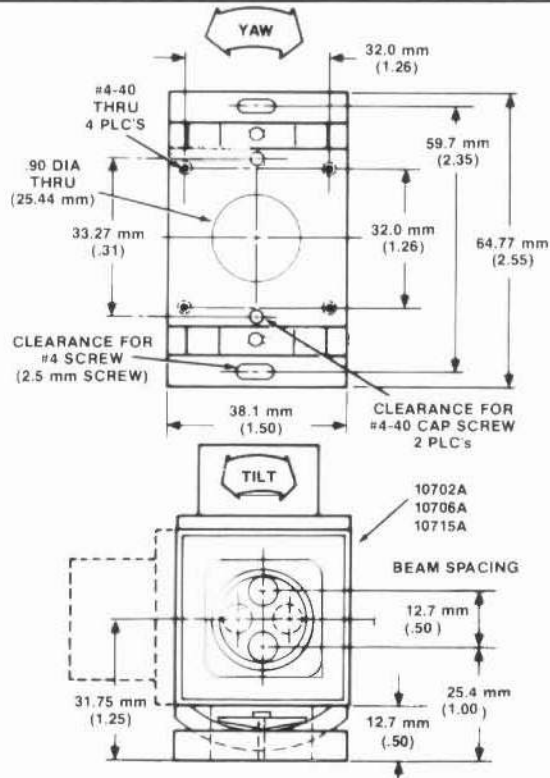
HP 10711A Adjustable Mount, Dimensions
